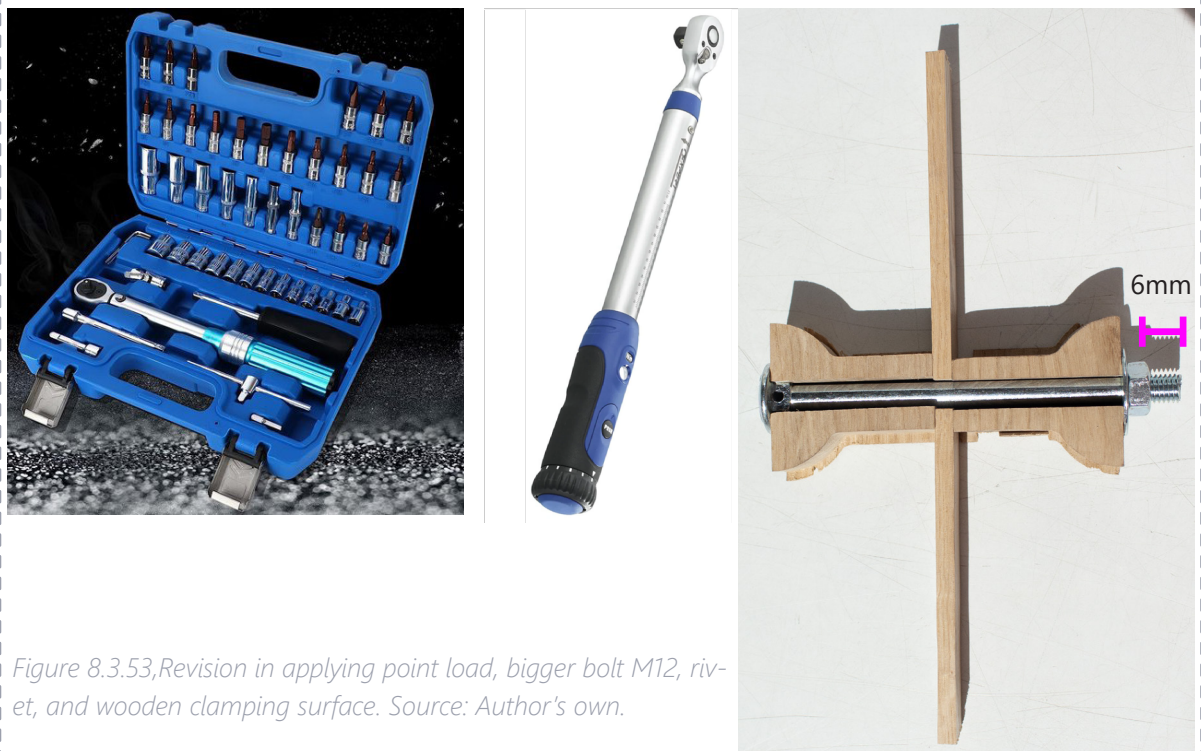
, Revision in applying point load, bigger bolt M12, rivet, and wooden clamping surface. Source: Author's own.
